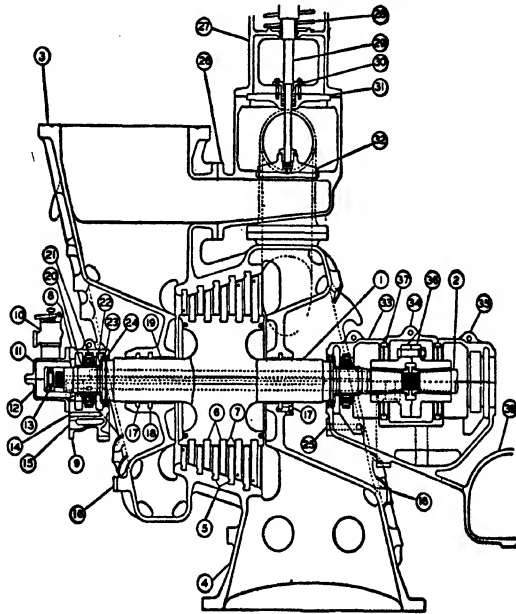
Section through a five-stage reaction gas turbine. 1. Turbine spindle. 3. Inlet. 4. Exhaust. 5. Fixed blades (nozzles). 6. Moving blades. 10. Emergency overspeed governor. 13. Emergency overspeed trip. 17. Sealing air. 19. Labyrinth seal. 21. Bearing. 26. Inlet to exhaust by-pass. 32. By-pass valve. Overspeed control. 36. Coupling to compressor. (Courtesy Allis Chalmers Mfg. Co.)
